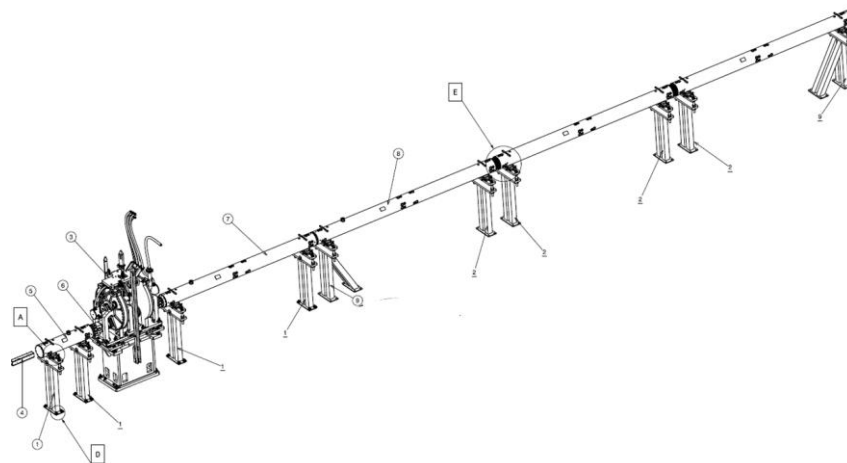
Mechanical assembly drawing showing all the in-bunker components.
